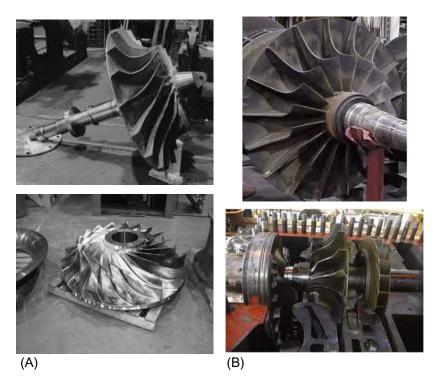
(A) *Top*: A fabricated semienclosed impeller; *Bottom*: A semienclosed impeller with machined blading integral with the back plate. (B) *Top*: Semiopen impeller installed on a multistage centrifugal compressor; *Bottom*: Damaged semiopen impeller on the first stage of a multistage centrifugal compressor.
